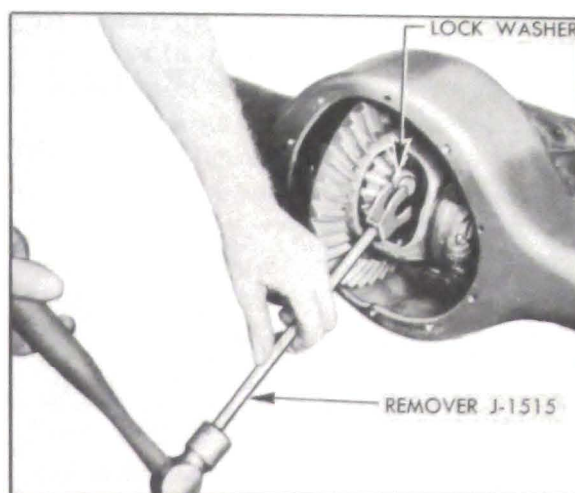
Removing Axle Shaft Lock Washer with Remover J 1515
